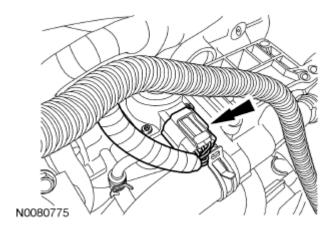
Locating EGR Valve Electrical Connector Courtesy of FORD MOTOR CO.
